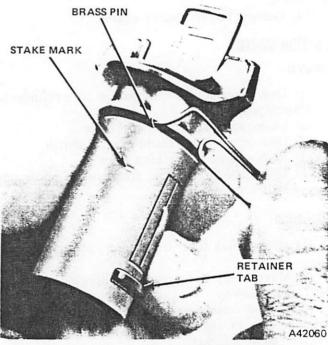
J-65 Compressing Lock Cylinder Plunger Pin
